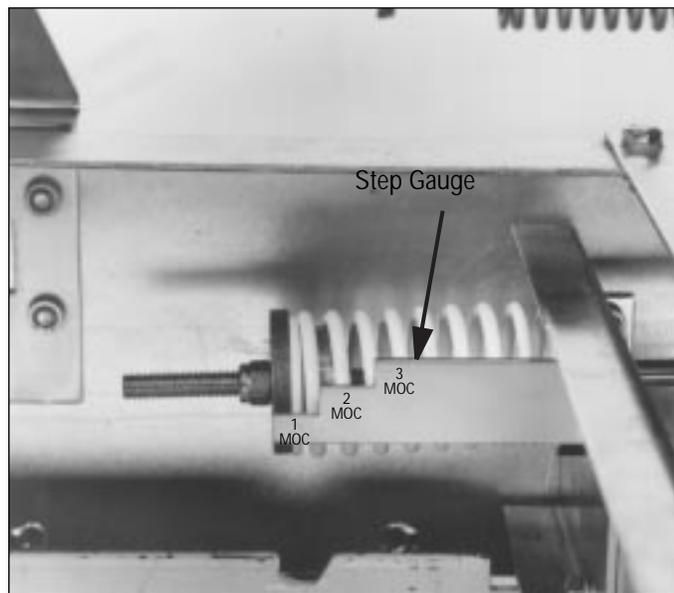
Drive Spring Adjusted for 0 or 1 MOC Switch
